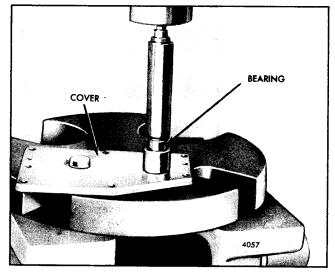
· Installing Governor Cover Bearings using Tool J 21068
